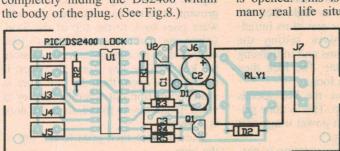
Use this overlay diagram for the lock PCB as a guide when you are wiring up your own board. Note that J2-J5 connect to hidden control keys.
